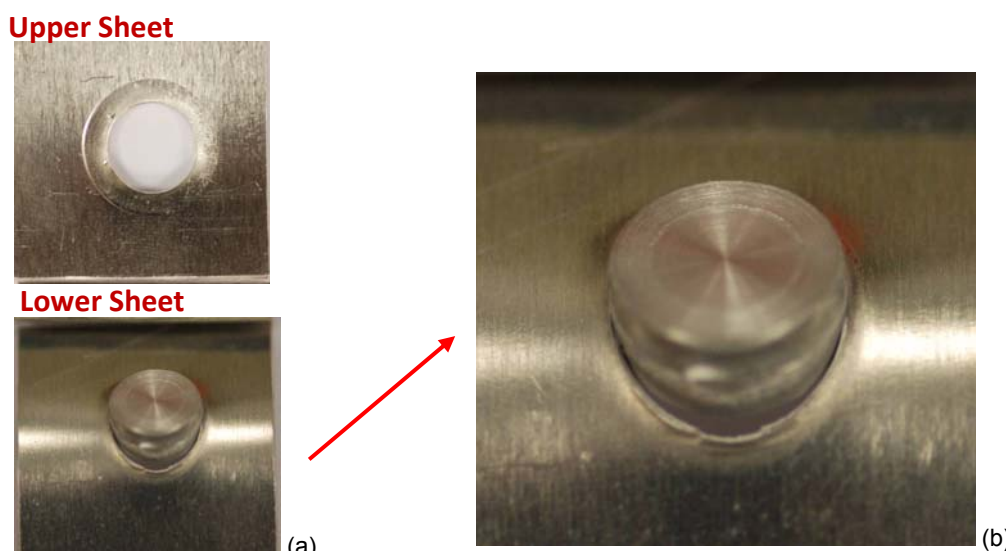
Failure mode after LSS testing showing (a) the upper and lower sheets of a shear failed specimen; and (b) a close-up view of the nugget pull-out on the lower sheet.
